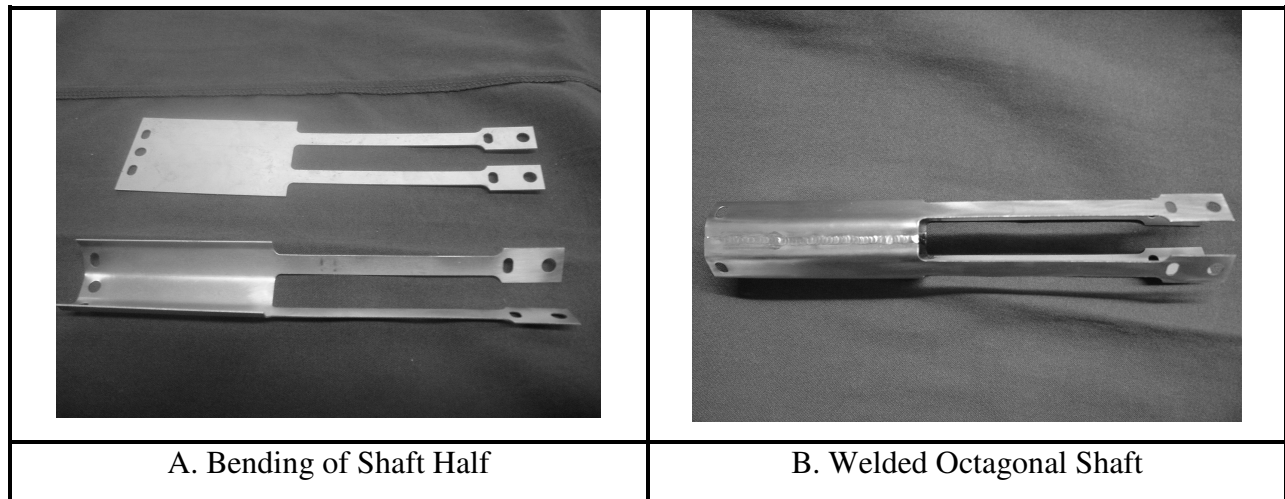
Bending and Welding to Form Octagonal Shaft
